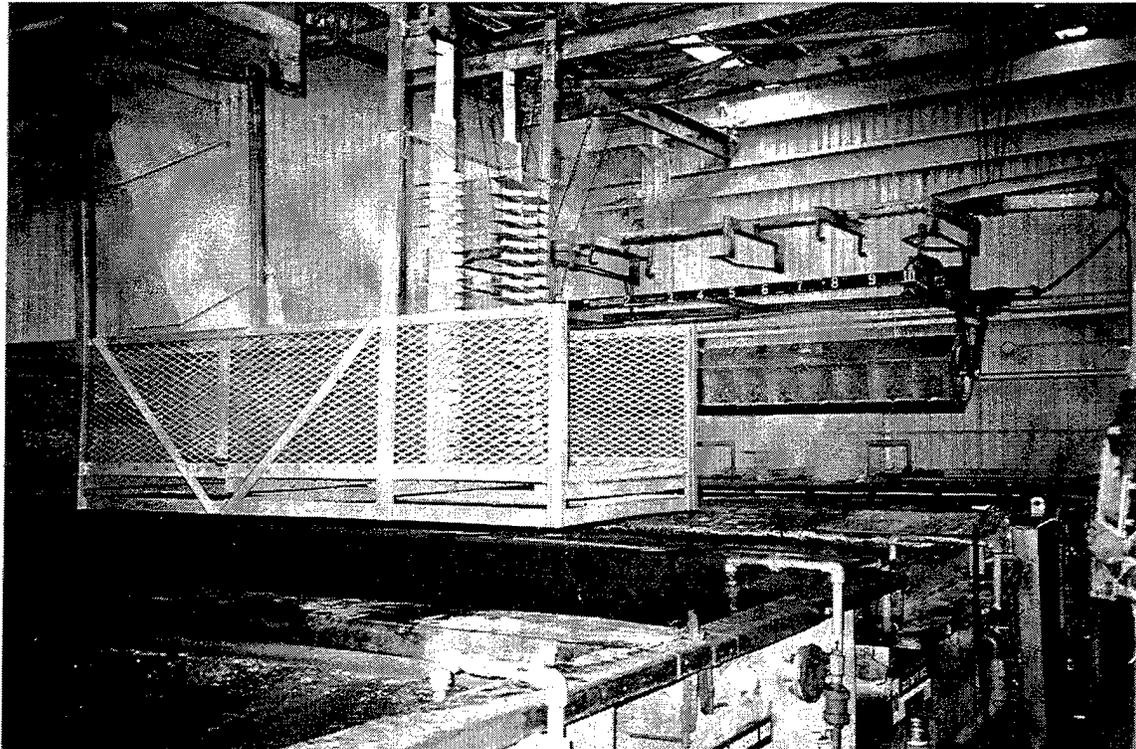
Racked panels are lowered into industrial-sized tank for immersion aqueous degreasing.
